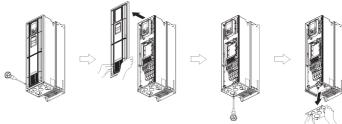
Removing the Front Cover and the Wiring Plate (VXH75M-4E)
